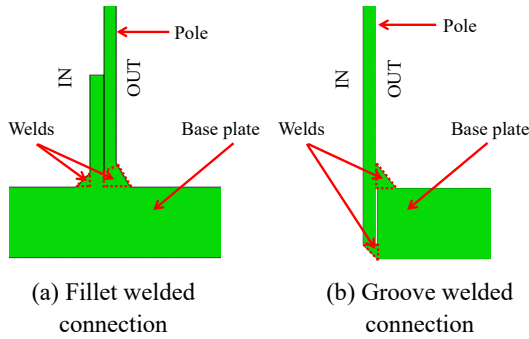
Two types of pole-to-base plate welded connections
